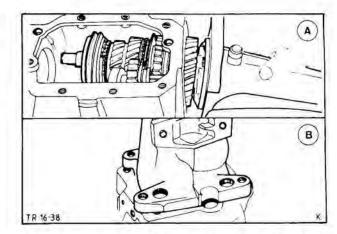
A/B – Fit extension housing and then turn so that hole for countershaft is accessible
